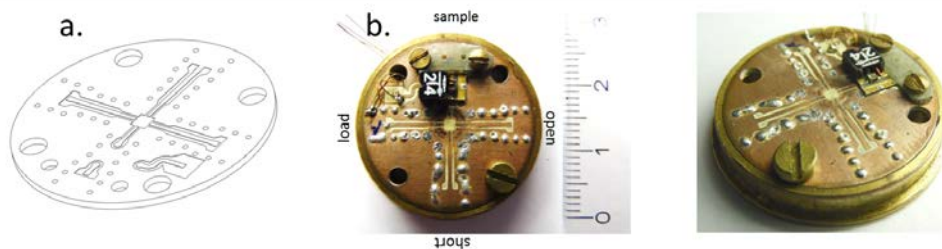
(a) 3D view of the final chip design. (b) Pictures of the assembled calibration chip.
